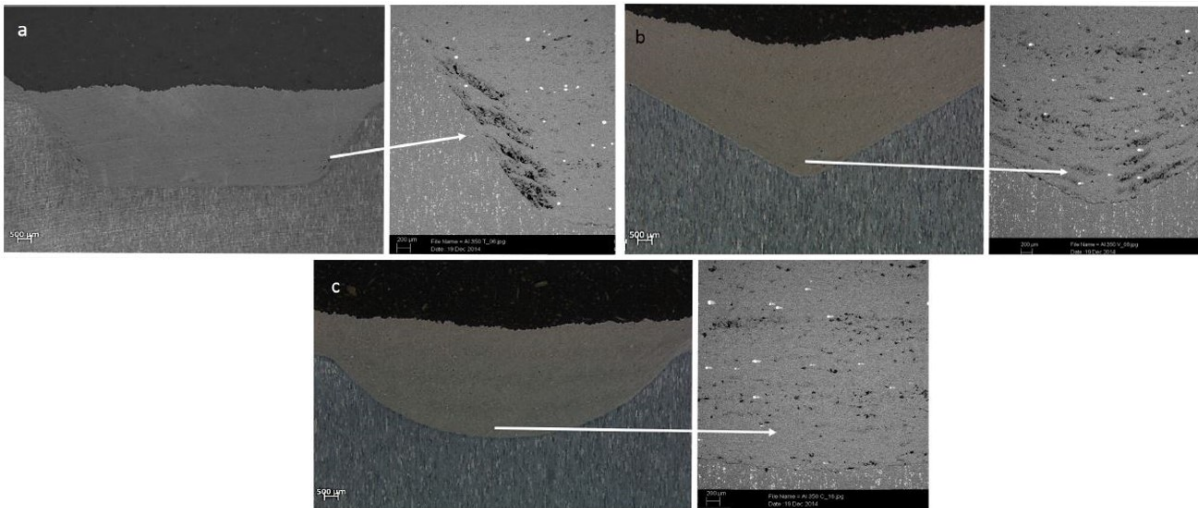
Cross-section of different pre-machining with porosity on non-horizontal surface in (a) trapezoid shape, (b) conical shape and (c) circular shape [40].
